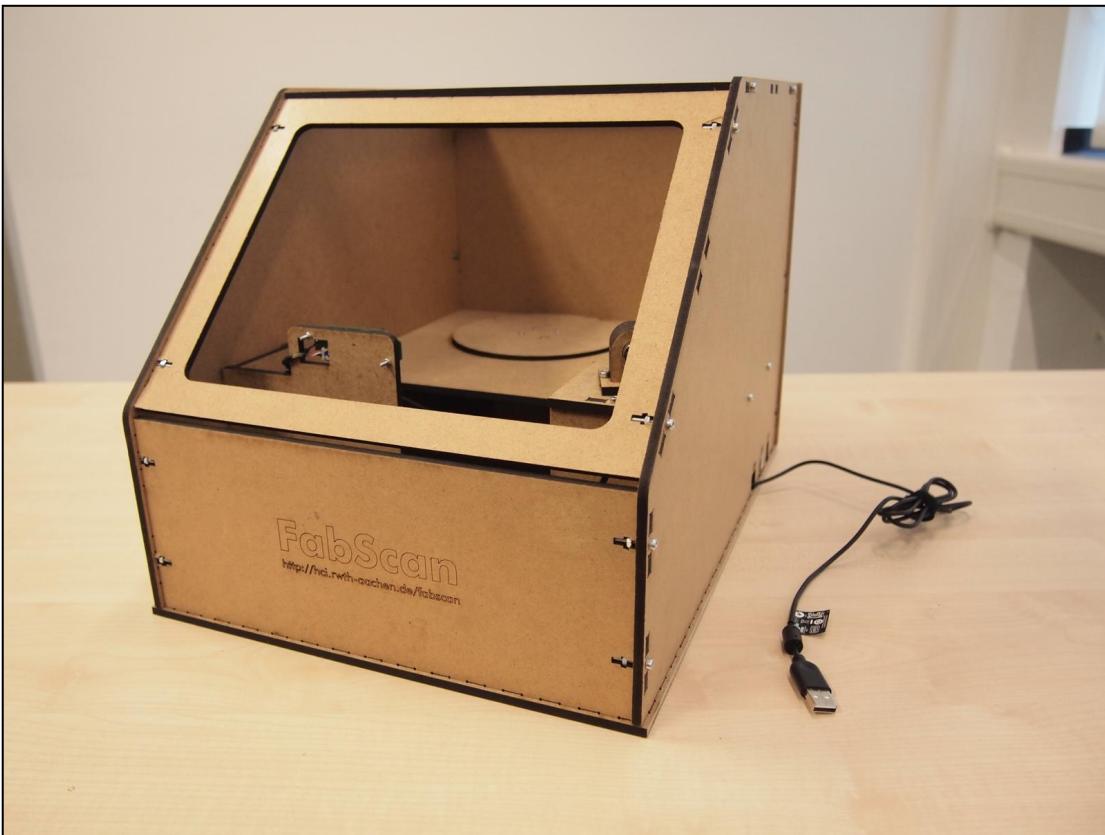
Place the 'Housing' assembly group to the Box bottom.
